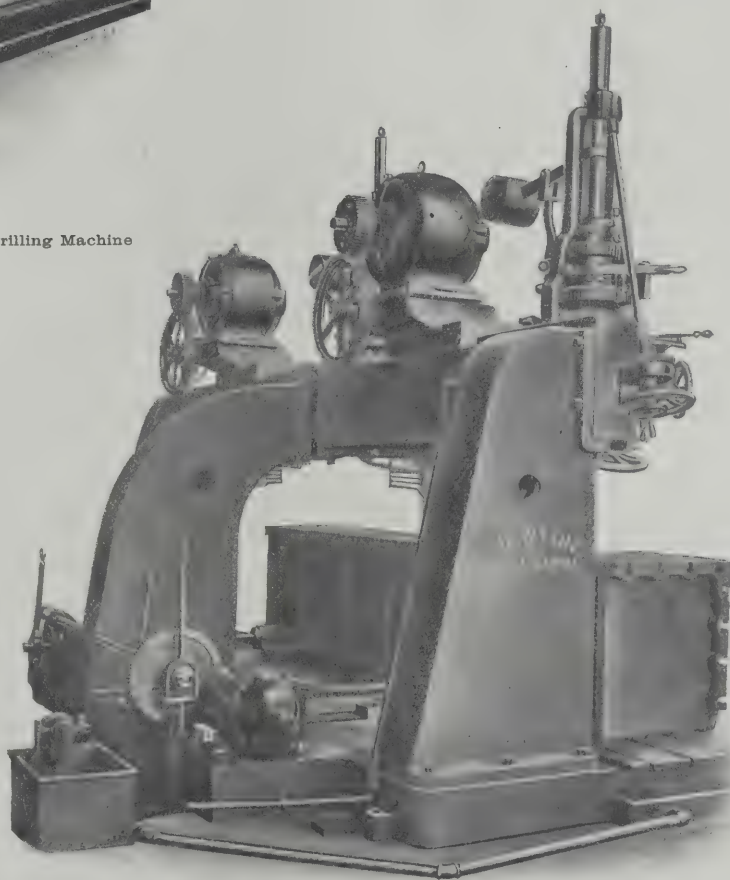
Rear View of Newton Two-spindle Drilling Machine, showing Motor which operates the Adjustable Work Tables
